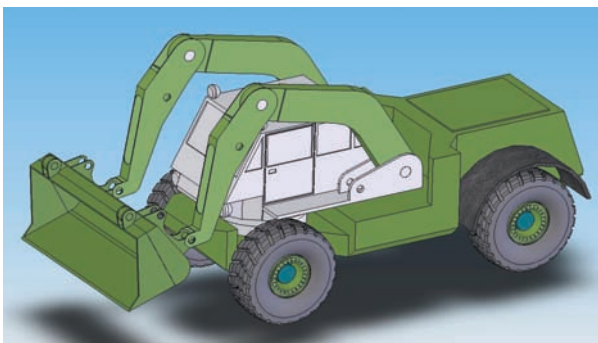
General concept view of Multi-task Engineering Machine WMI-PINIA with two-part bucket of loader
